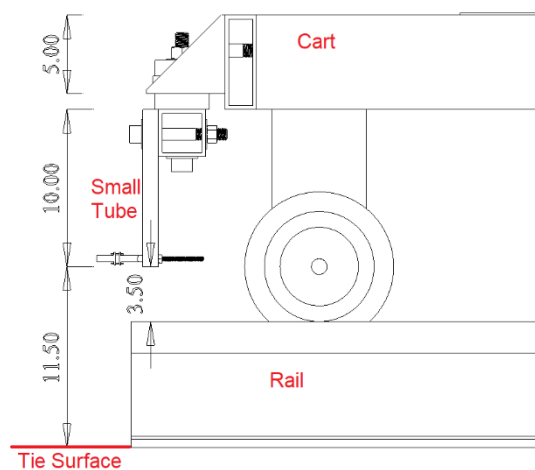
Side view diagram of the prototype mounted on the test car
